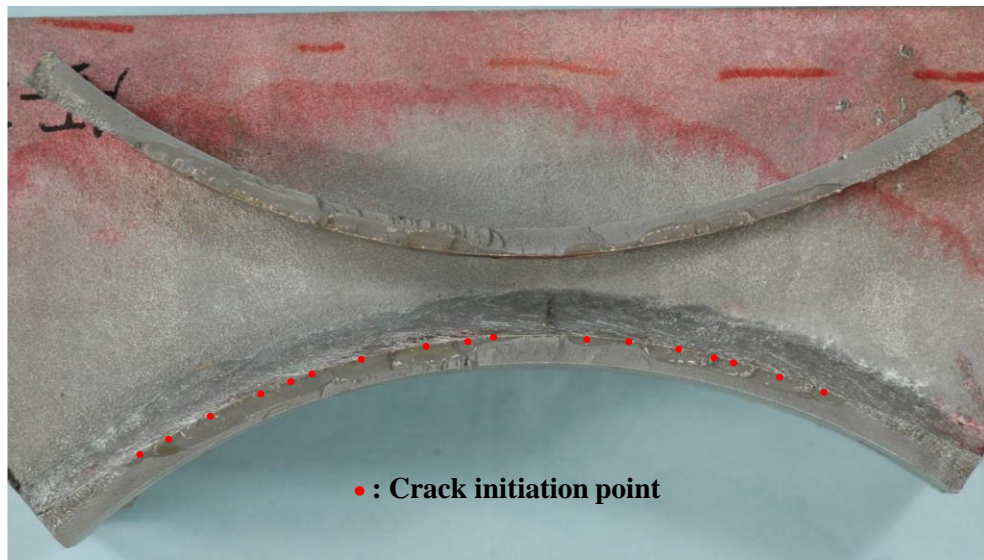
Fatigue fracture surface and identified crack initiation points in Type I-2 Arm
